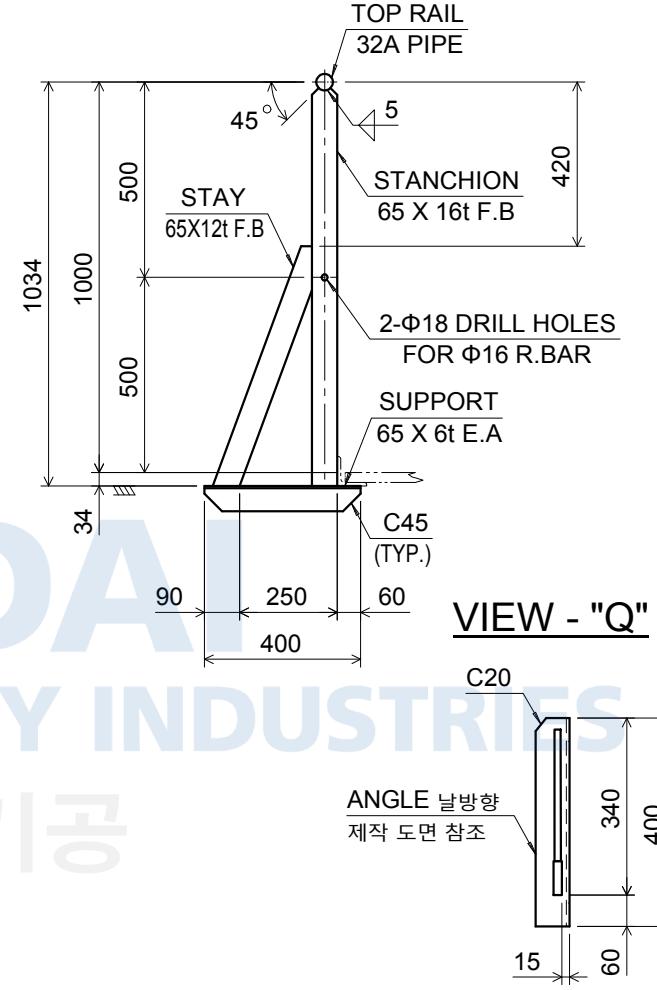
DETAIL OF HANDRAIL STANCHION FOR PLATFORM
